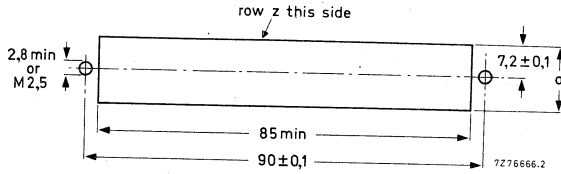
Panel cut-out; see Table 4 for dimension a.
